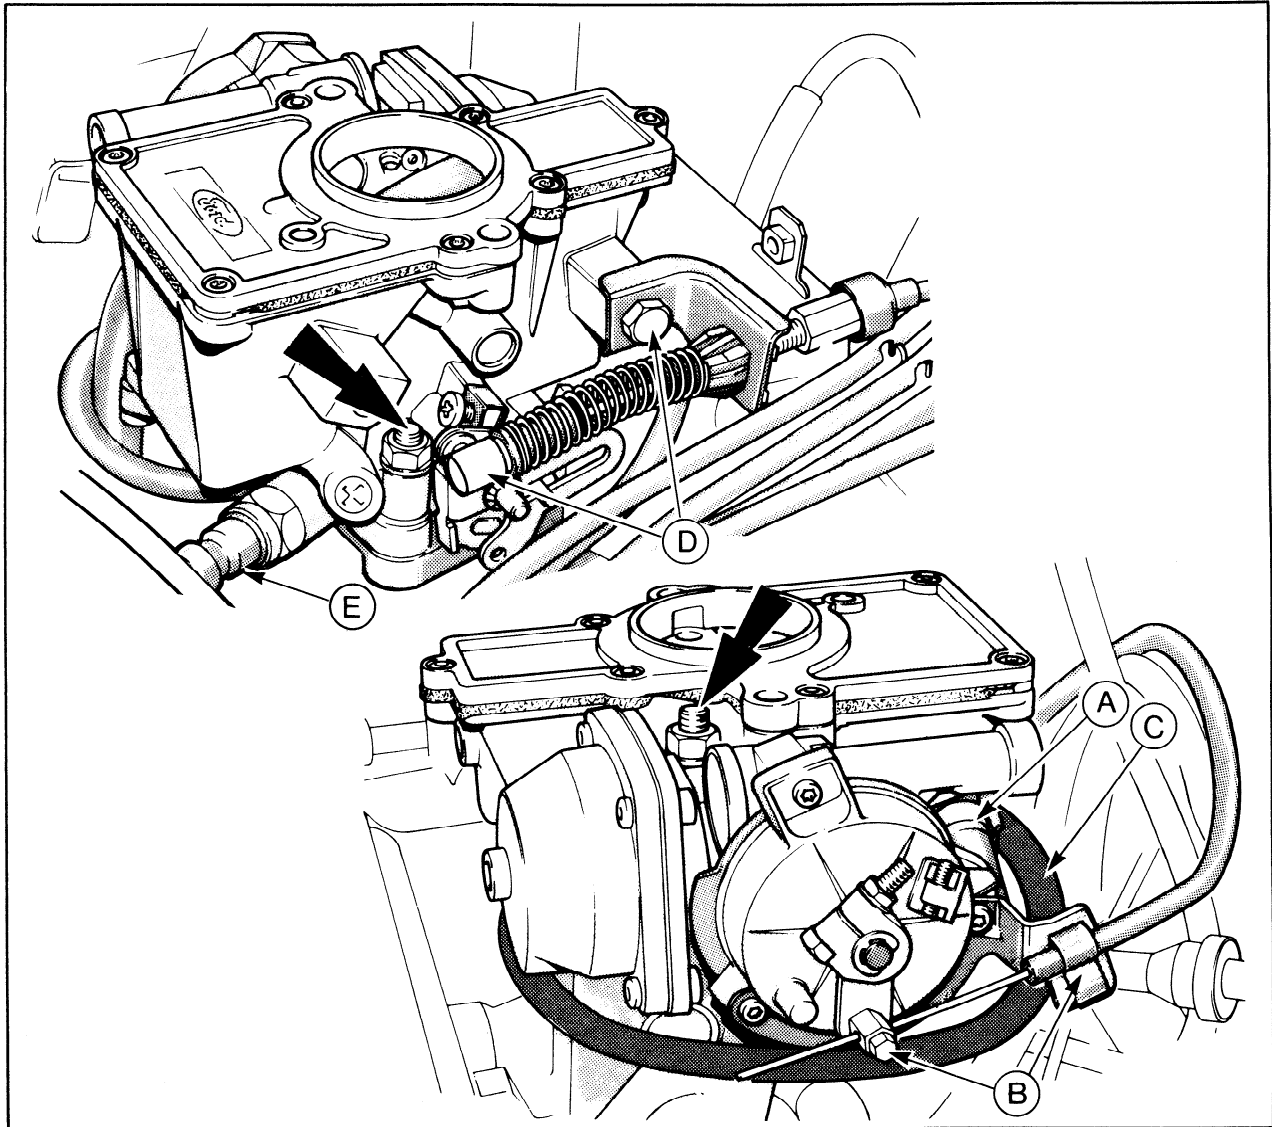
Items to be Disconnected for Manual Choke Carburetor Removal (Carburetor Retaining Nuts Arrowed)
